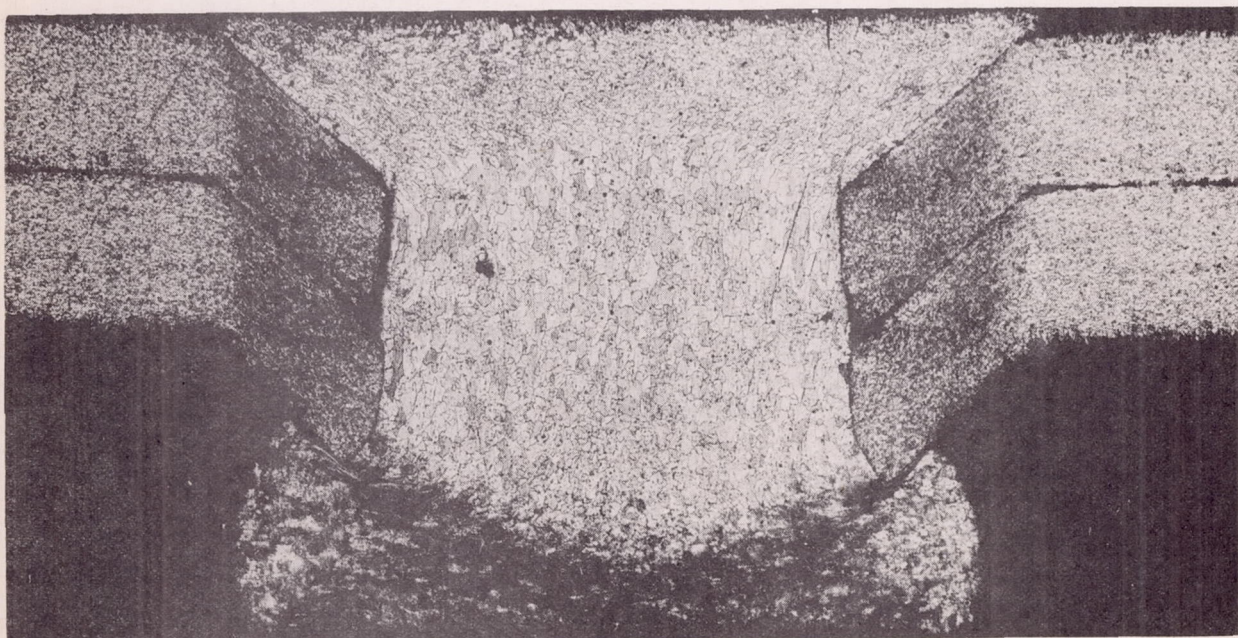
Set of dimples produced in 0.040-inch 24S-T sheet after maximum die diameter was made 3.5 percent less than the maximum punch diameter. Dimples produced with 5000-pound pressure in sheet drilled with an 0.1100-inch diameter No. 35 drill. Magnified 20 times.
